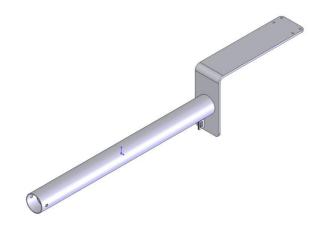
3D model of Horizontal Shaft; made from aluminium plate and tube.
